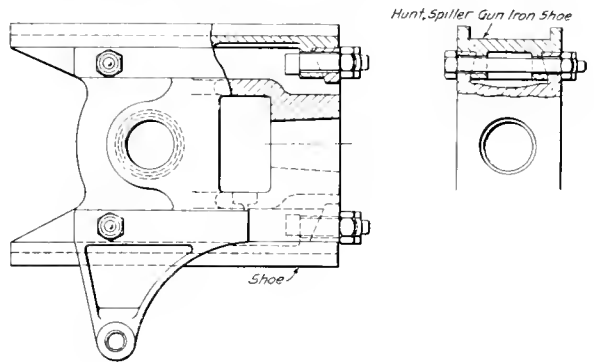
Shoe Fastening as Applied to Crosshead with Piston Rod Held by a Nut
